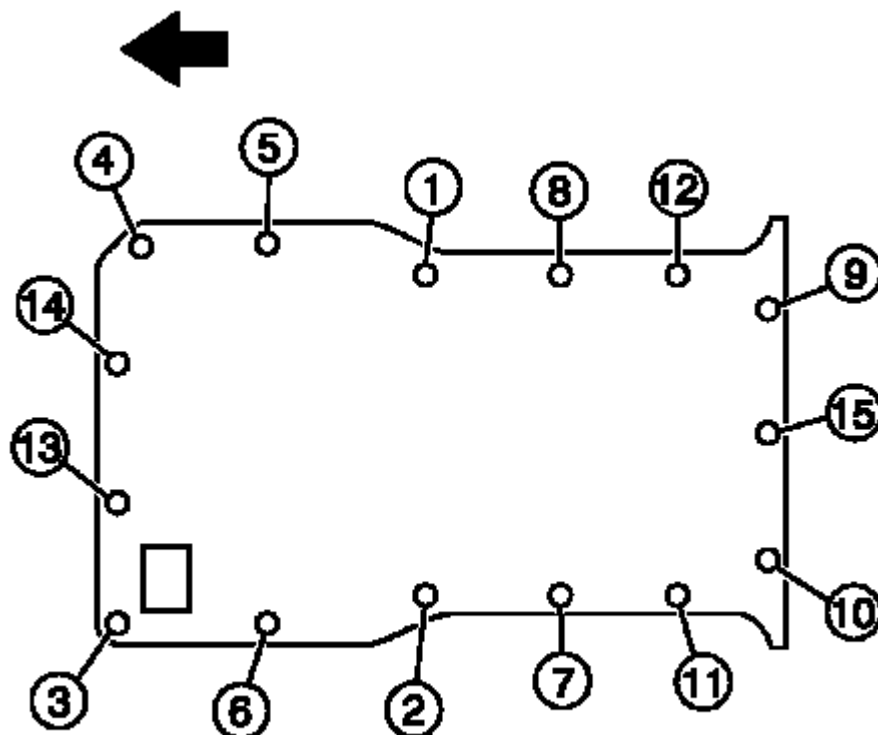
Identifying Oil Pan Bolts Removal & Tightening Sequence
